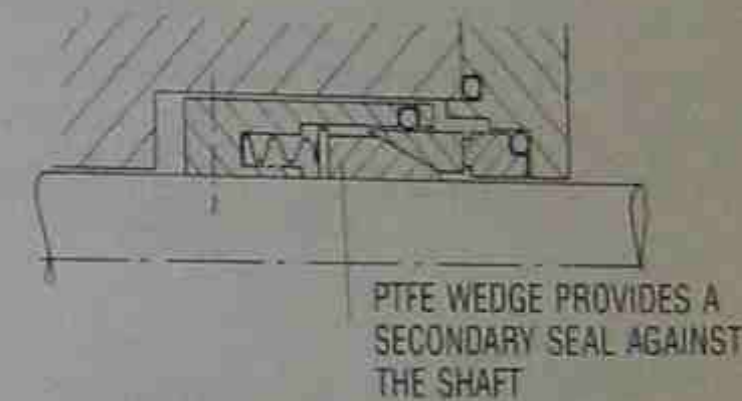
Using a PTFE wedge to prevent leakage between the rotating ring and the shaft.
